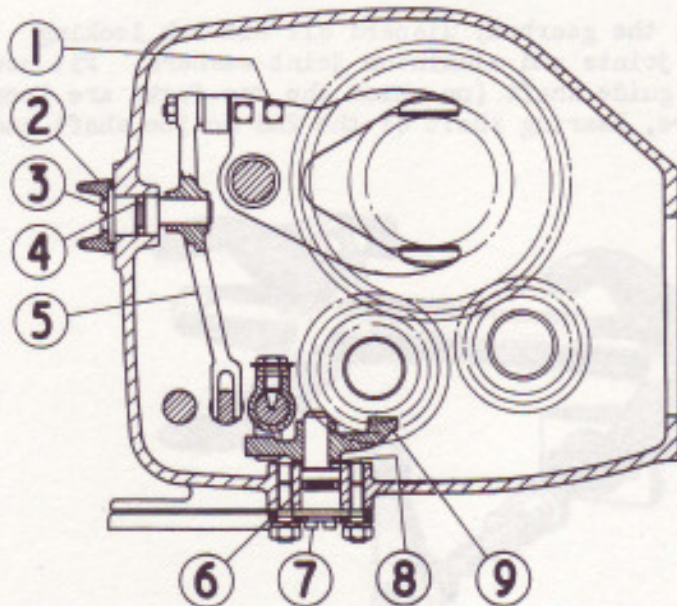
A. EXPLODED VIEW - INTERNAL SELECTOR MECHANISM.
